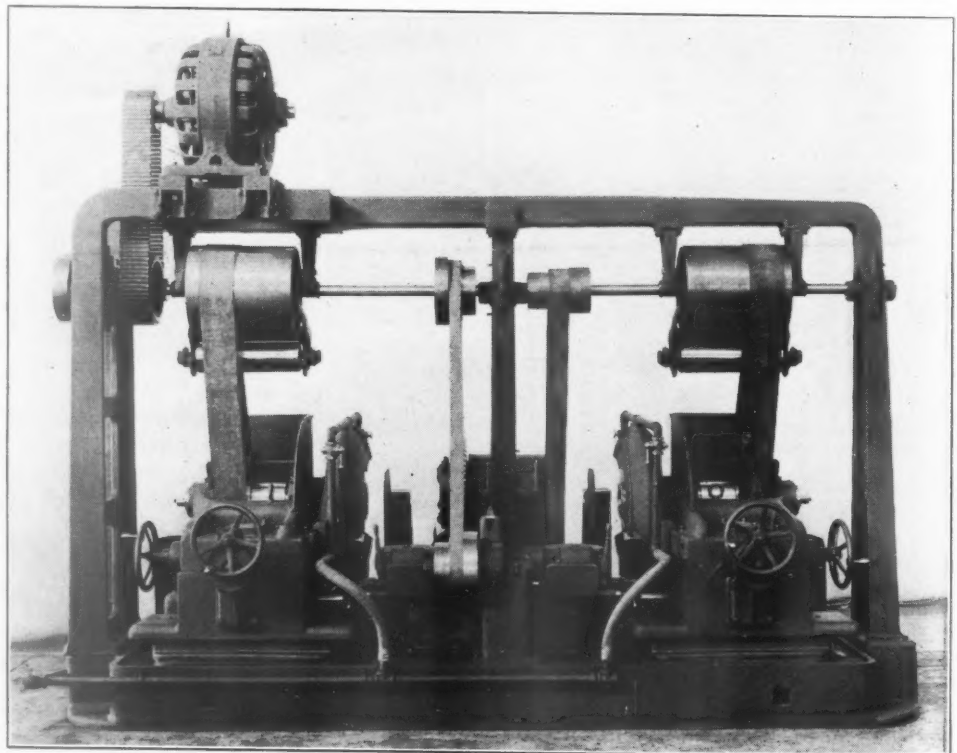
Machine Developed for Grinding Mounted Car Wheels
